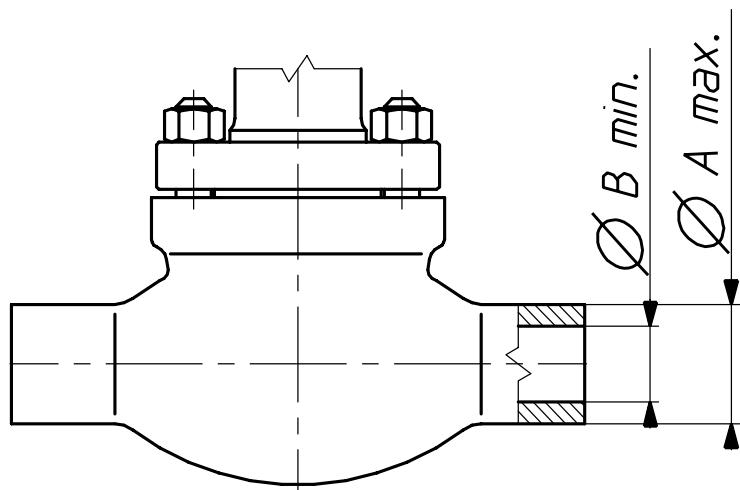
Dimension of butt welding ends executed as cast
